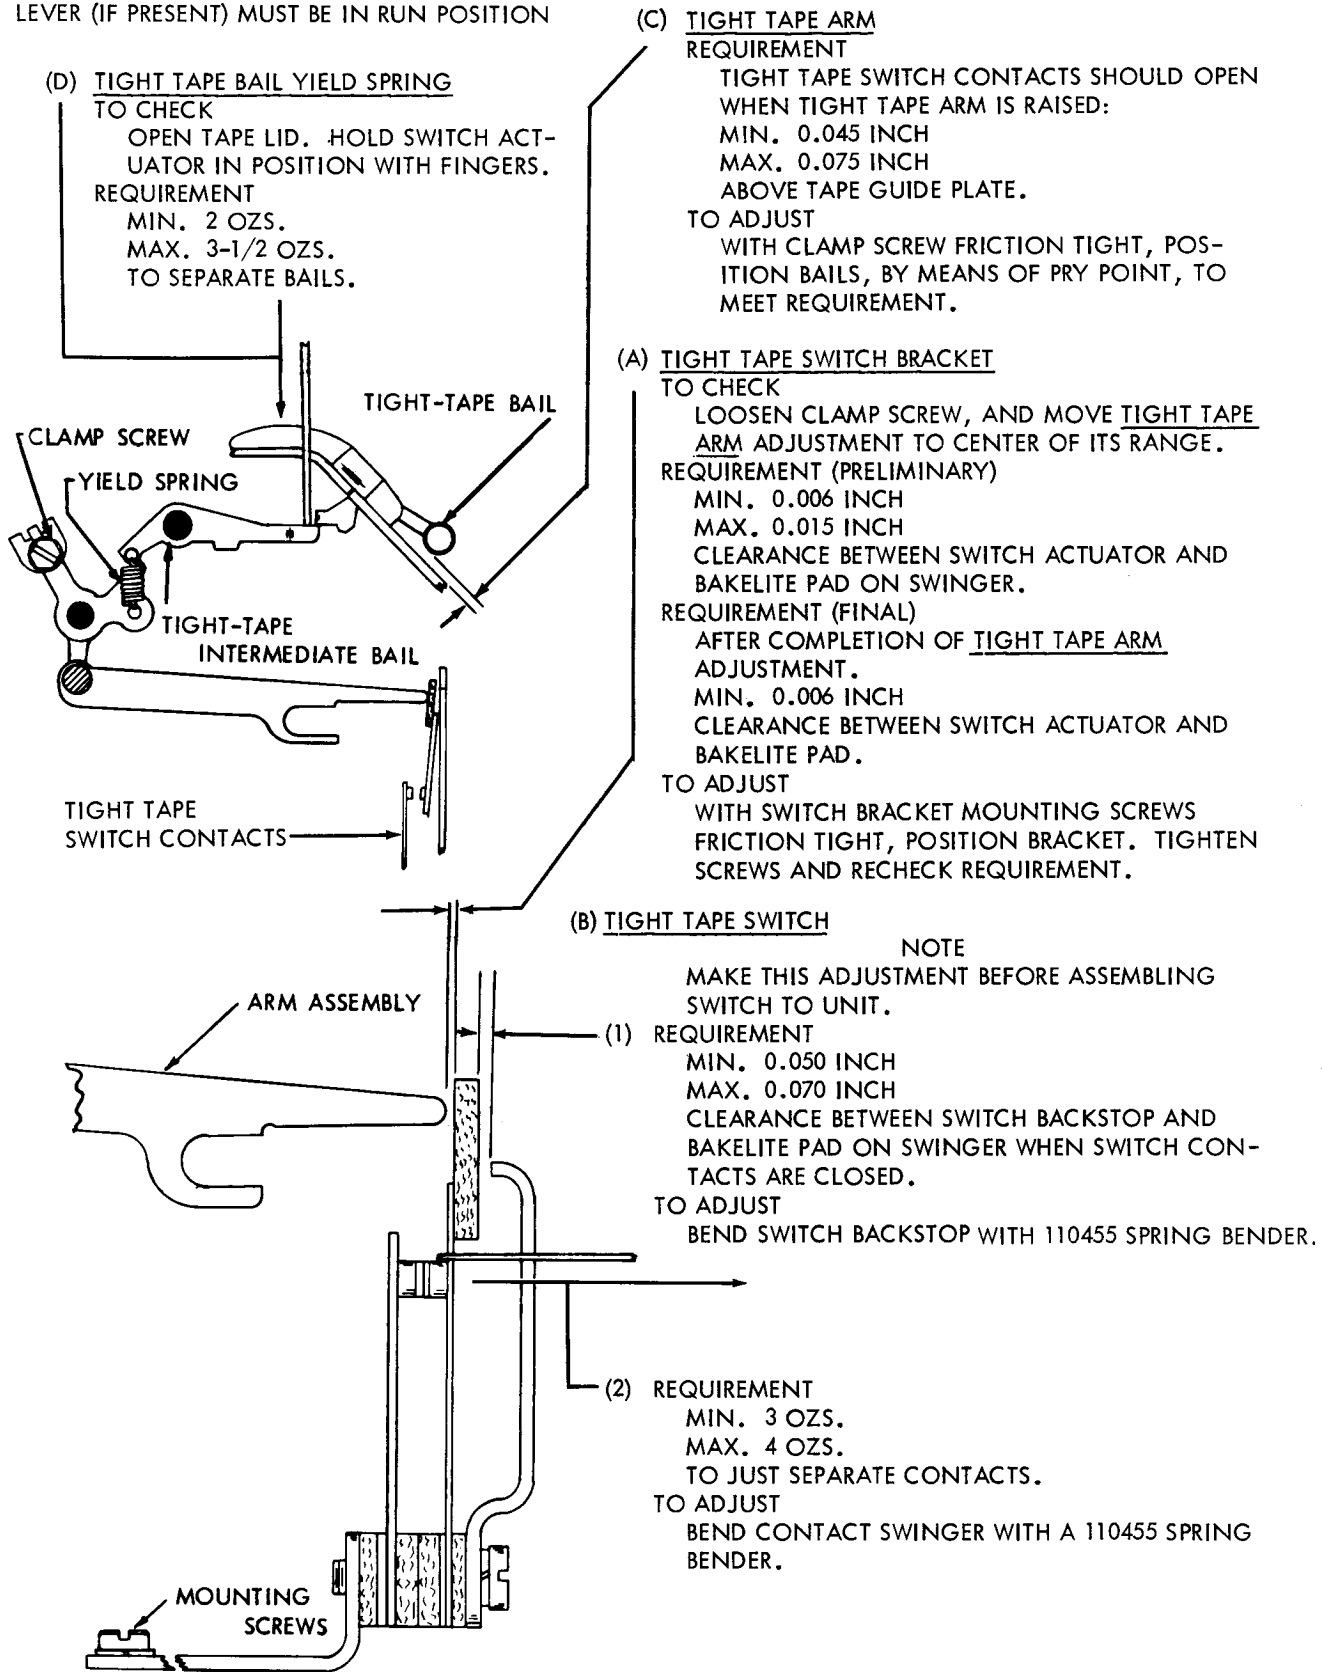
TIGHT TAPE SWITCH ASSEMBLY
